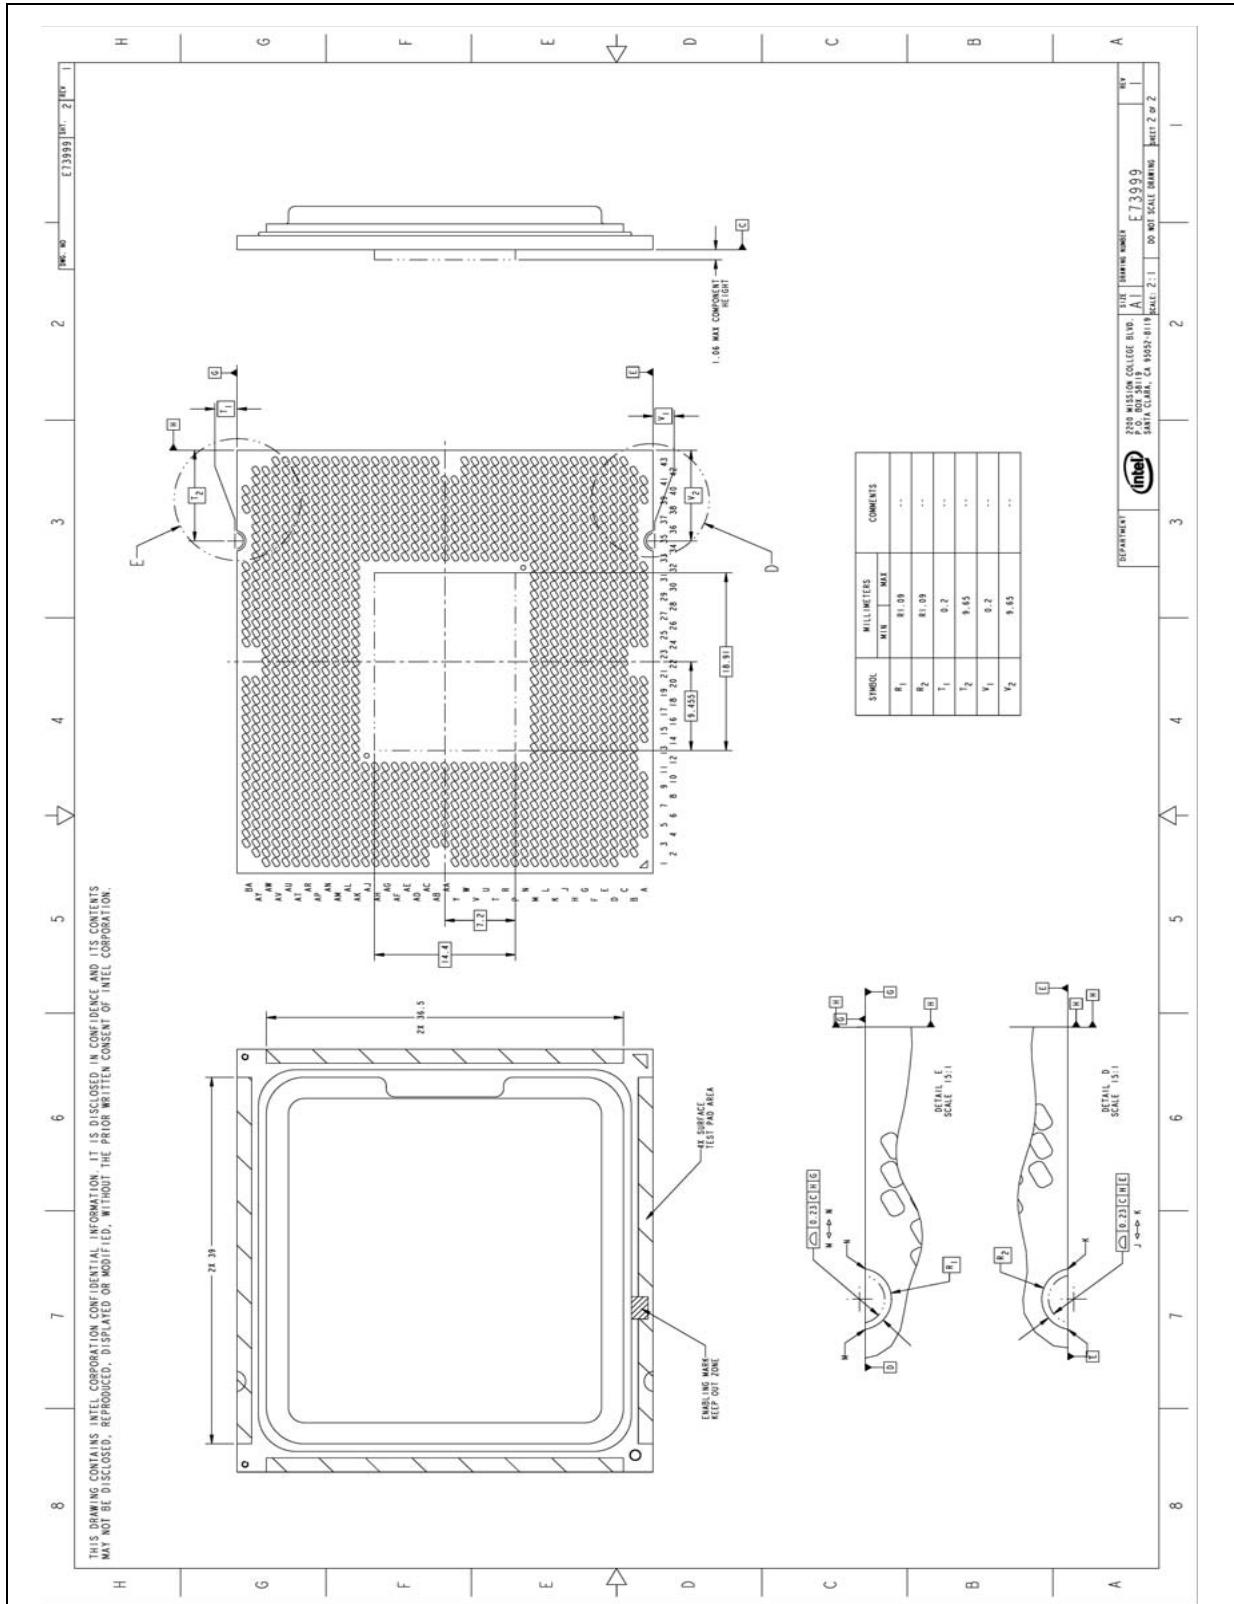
Processor Package Drawing Sheet 2 of 2
